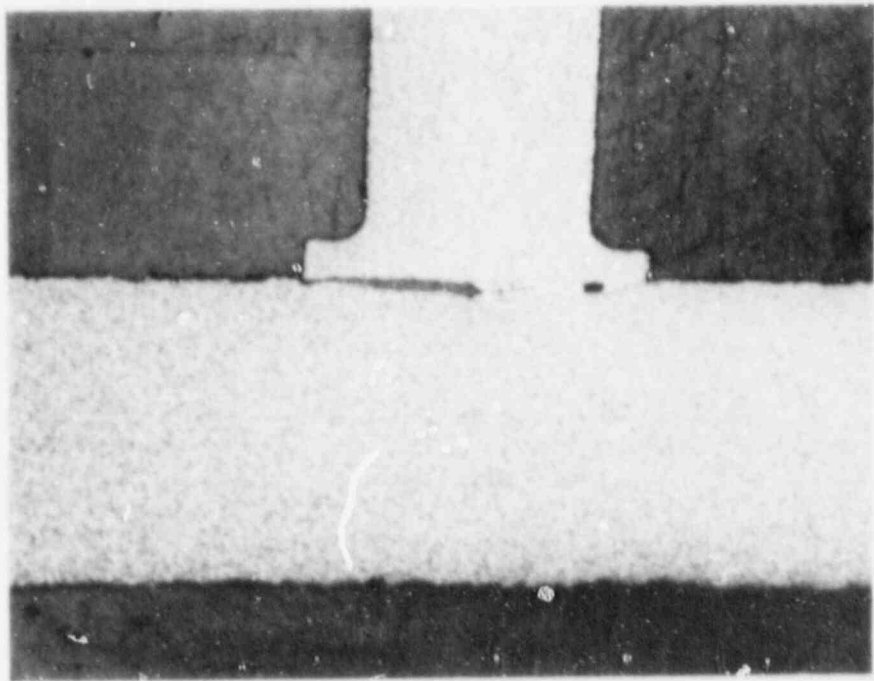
Cross-section of stud weld to insert plate material (8.5x)
